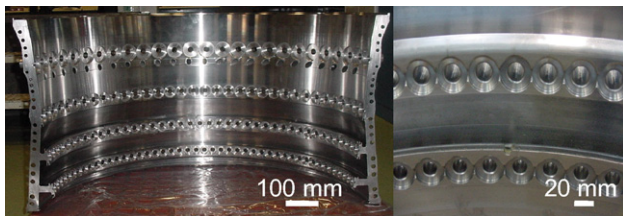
Compressor casing (burrs from drilling and milling) [5].
